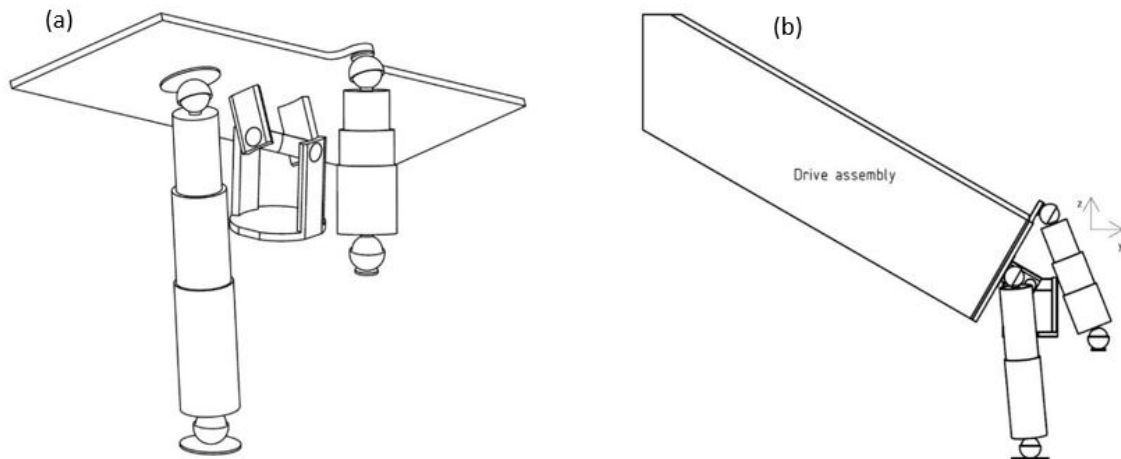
(a) tiltable plate with Cardan joint; (b) tiltable plate with the mounted drive assembly
